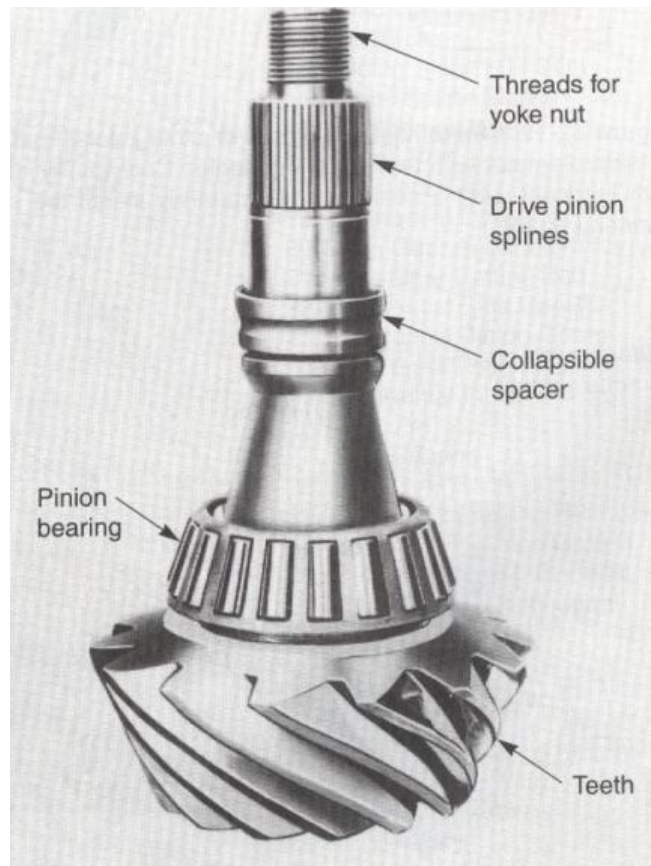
If the pinion gear uses a collapsible spacer, install a new one anytime the bearings are disassembled. If an old spacer is used, the bearing preload cannot be accurately attained.
